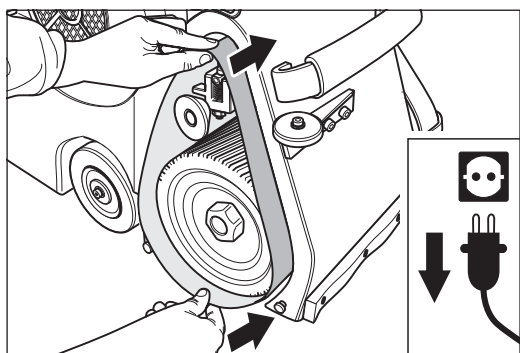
Push the sanding belt over the tensioning roller and sanding drum. Similar to figure.
